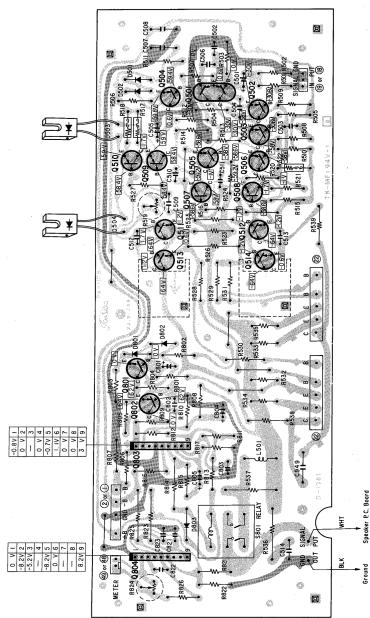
POWER AMP P.C. BOARD (PA-H05)(LEFT & RIGHT)
